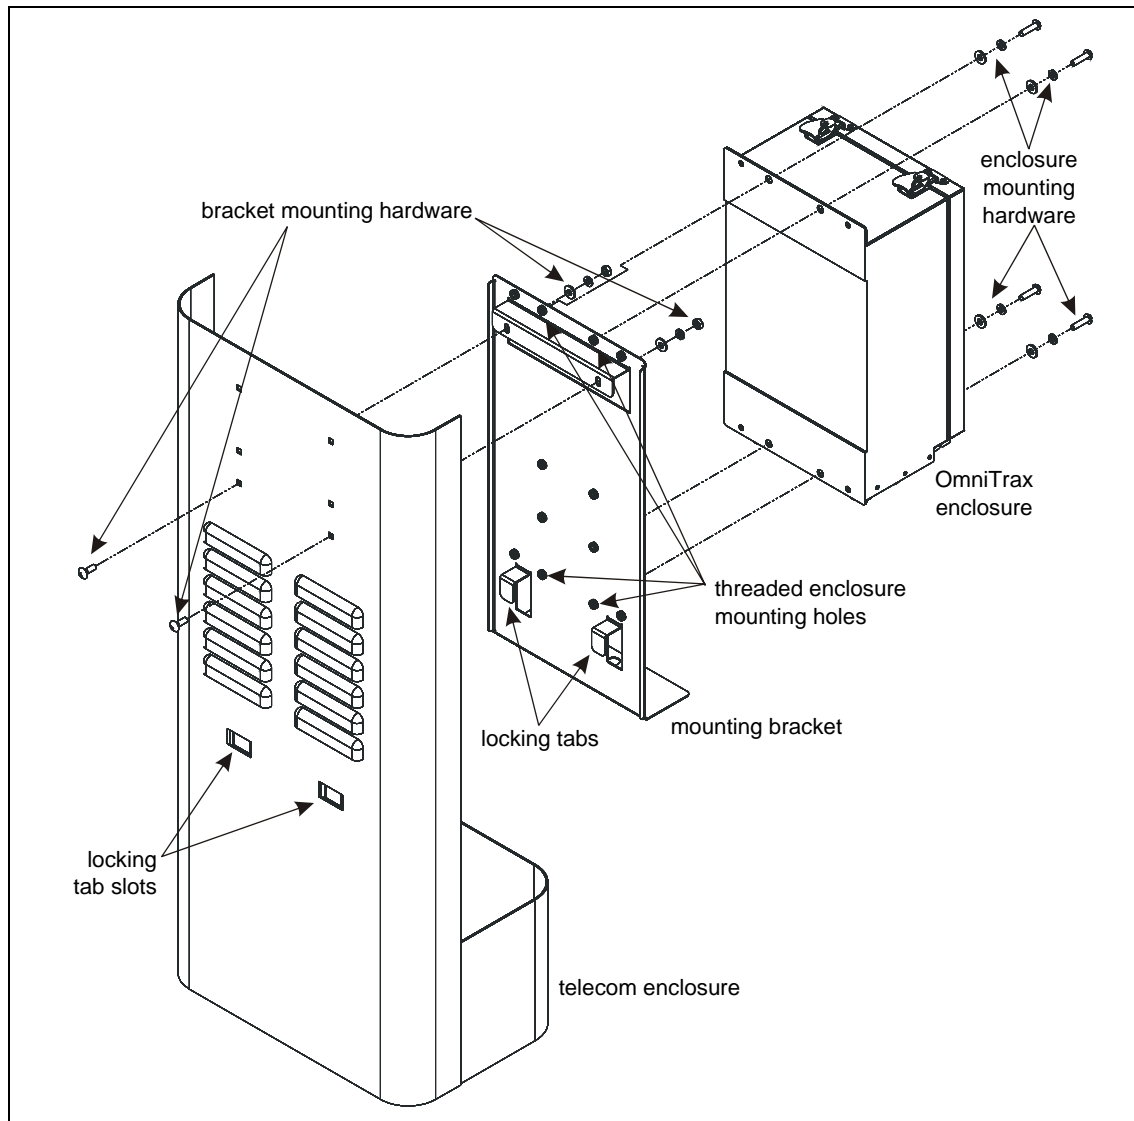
Mounting the bracket and OmniTrax enclosure - rear view
